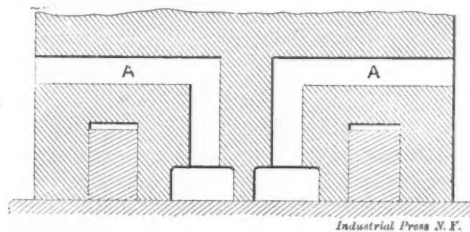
Thierry's "Self-poising" Steam Engine Piston.
